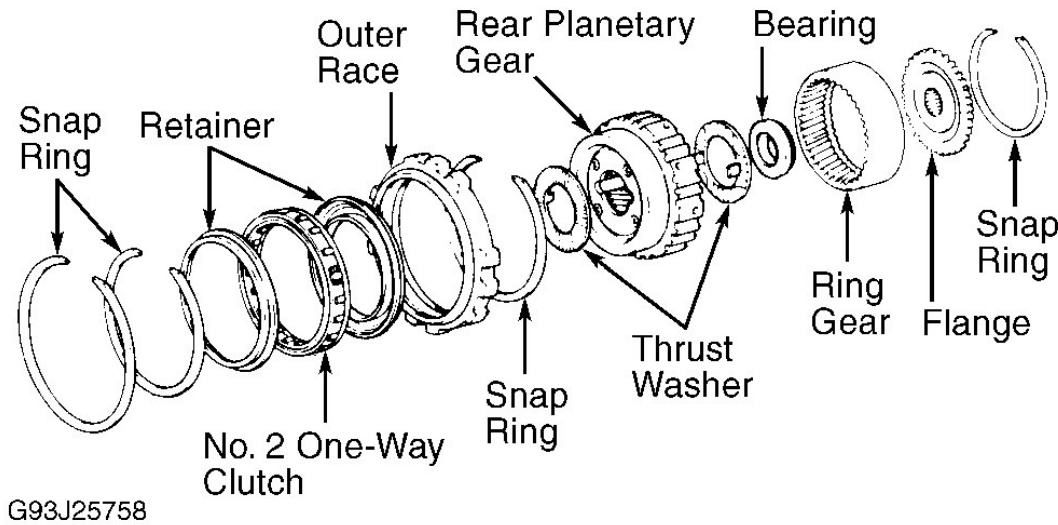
Exploded View Of Rear Planetary Gear (A-540H Shown; A-540E is Similar)
